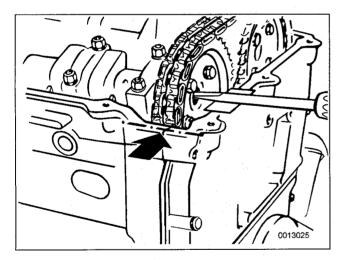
Install upper timing case cover with two bolts, then press down on cover so that top surface is flush with cylinder head (arrow). Hold cover in position and tighten bolts.
